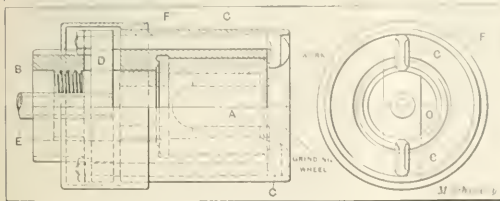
Satisfactory Device for holding a Main Drive Yoke that is easily sprung out of Shape
